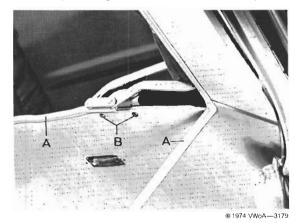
Screws with self-locking nuts B that must be removed before you can remove beading A.
